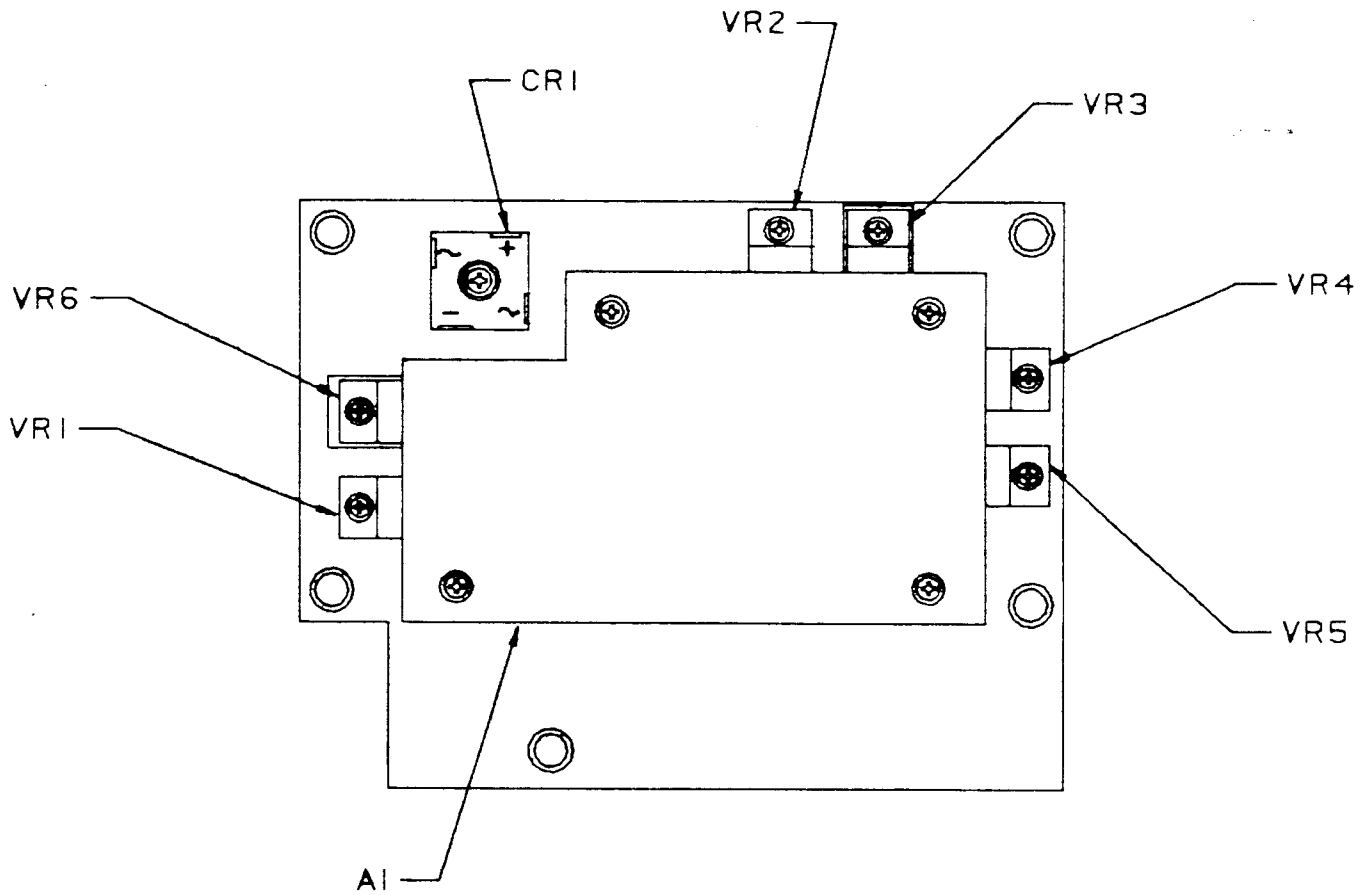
Power Supply Heatsink Assembly A15A2 Component Location Diagram (10073-3250)
